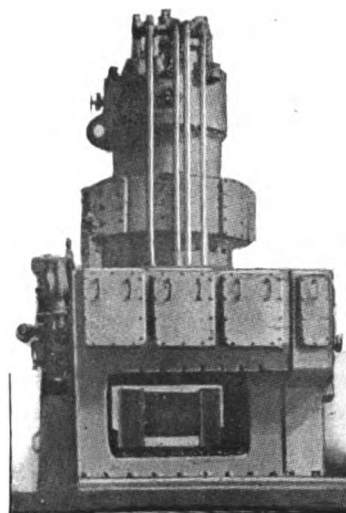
EXPERIMENTAL CYLINDER UNIT OF 1000 TO 1200 H.P., BUILT BY CARELS
